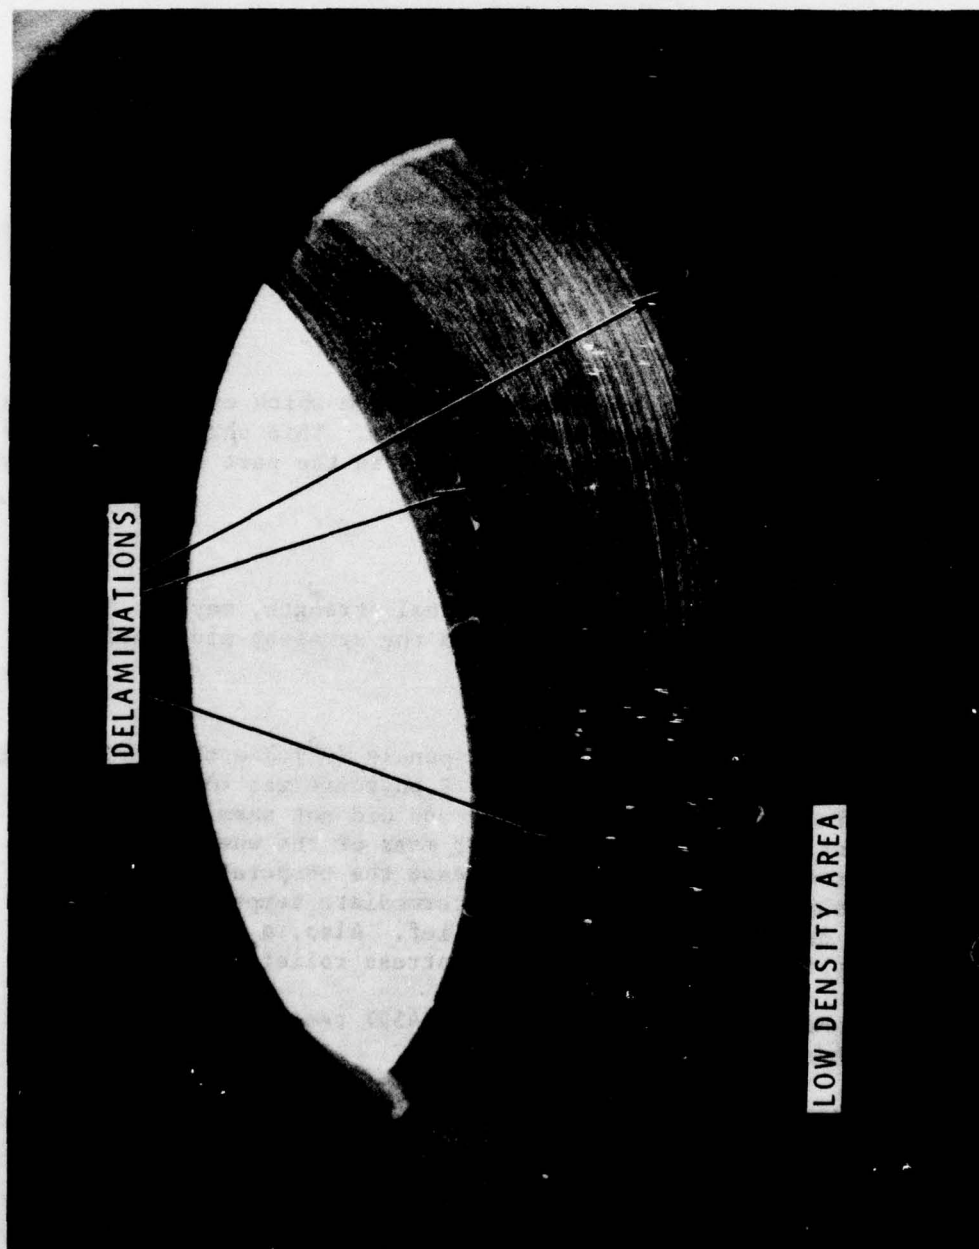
Postcured Inner Wheel Half Composite Defects as Viewed from Brake Side of Cooling Hole
